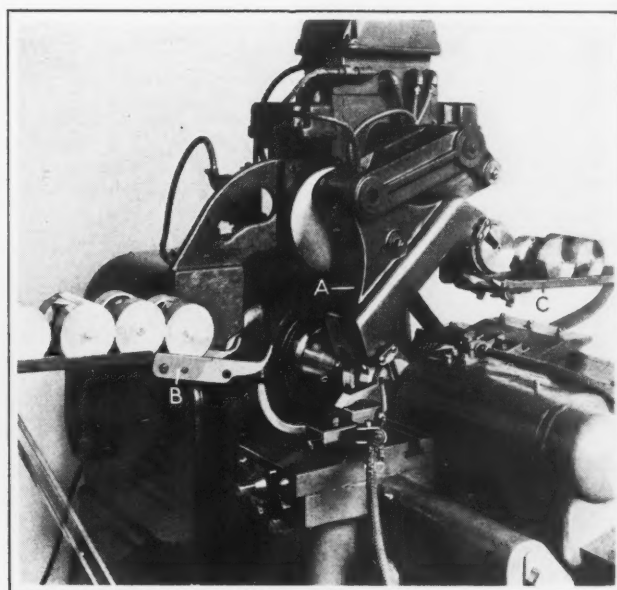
Placing the Finished Piston on the Discharge Chute and a New Piston into Line with the Tailstock Center and Headstock Driver
